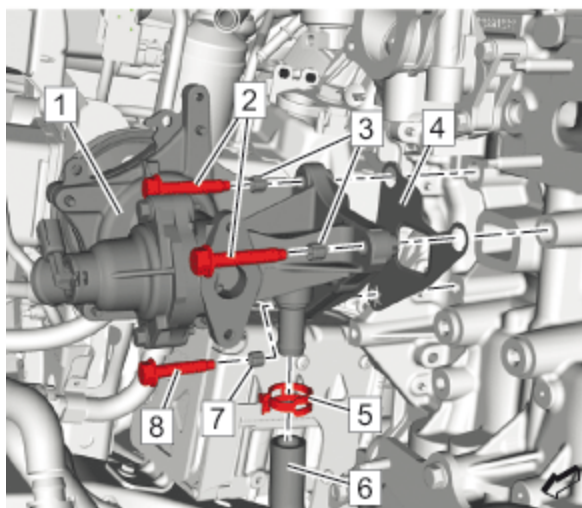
Exhaust Gas Recirculation Cooler Water Bypass Outlet Hose And Water Pump
